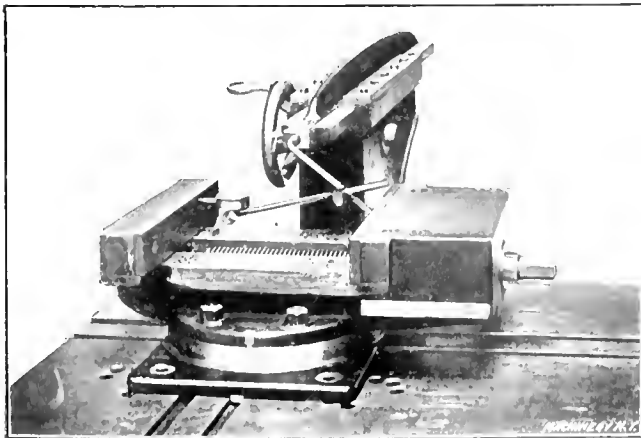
Shaper Vise-testing Machine. Testing Jaw Faces
